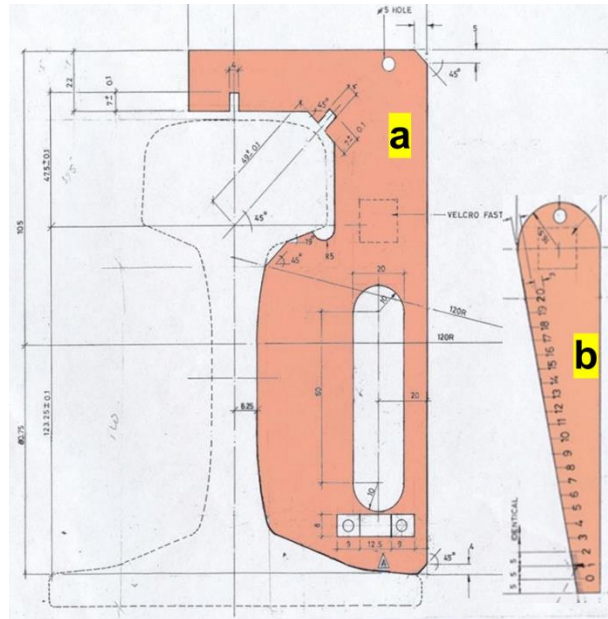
Rail wear measurement tool*- a) Rail measurement template b) Taper gauge
